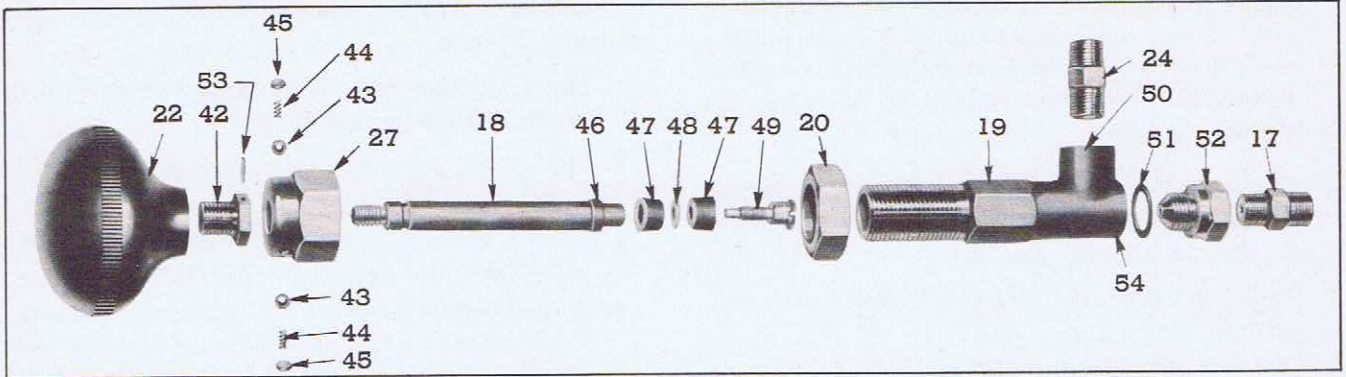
AIR HEATER PUMP AND RELATIVE LOCATION OF PARTS.
